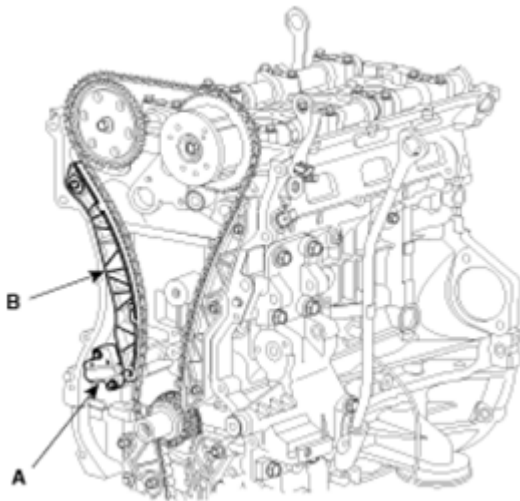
Identifying Timing Chain Auto Tensioner & Tensioner Arm (Single CVVT)
